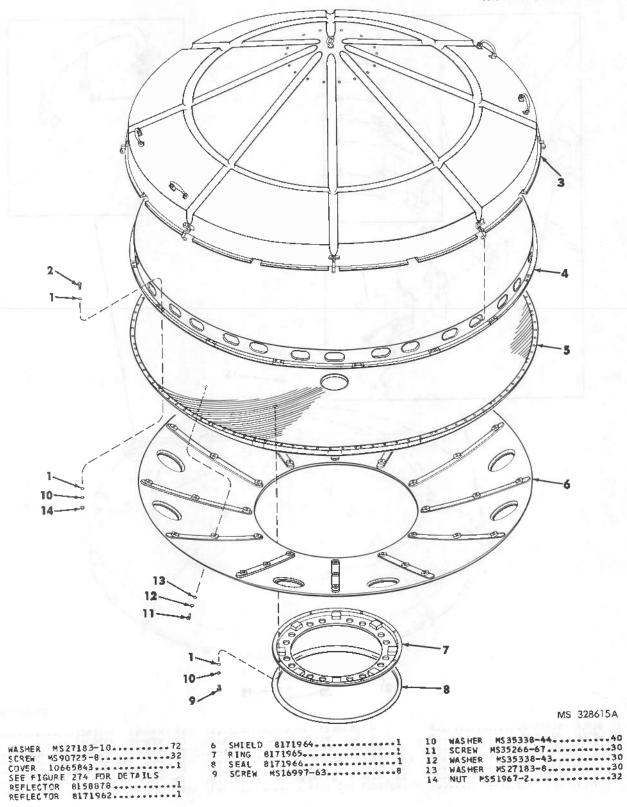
REFLECTOR ASSEMBLY, ANTENNA /8158879/-EXPLODED VIEW /SEE FIGURE 6 FOR NEXT HIGHER ASSEMBLY/
